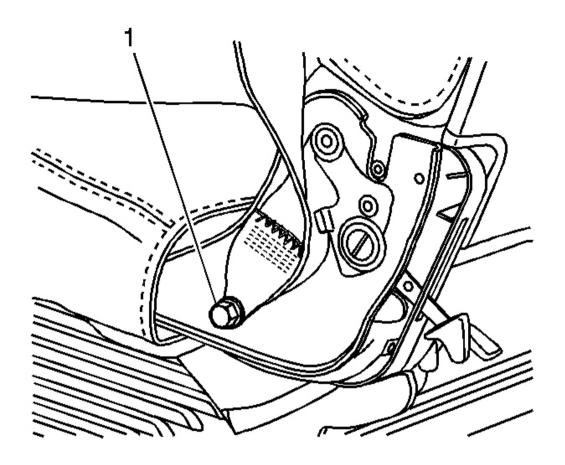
Seat Belt Anchor Bolt & Cushion Frame Courtesy of GENERAL MOTORS CORP.
